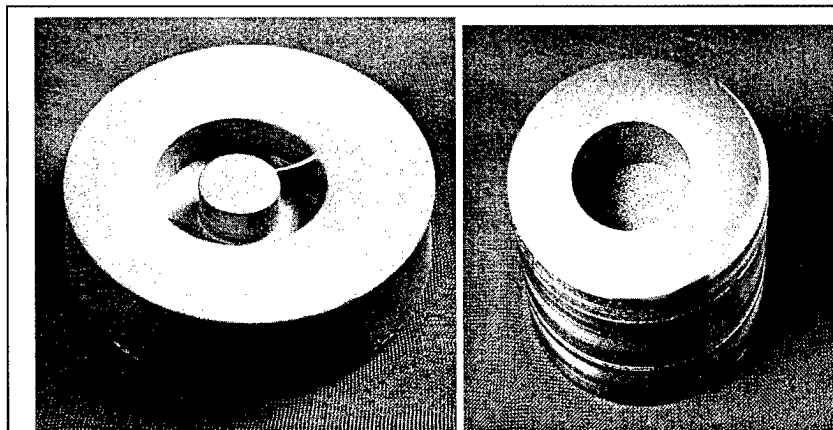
HIPed tool steel cavity fabricated using LOM alumina (left) and pressed SandForm silica (right)
